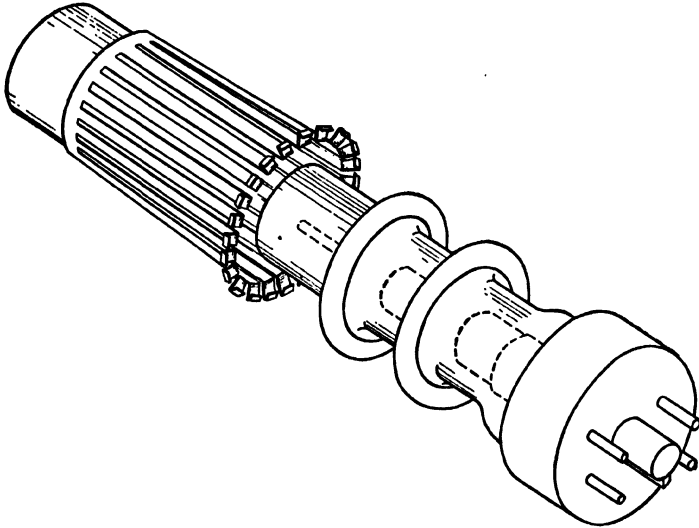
Collet fingers for clamping 2K28 tube to a small inner conductor of coaxial resonator.
